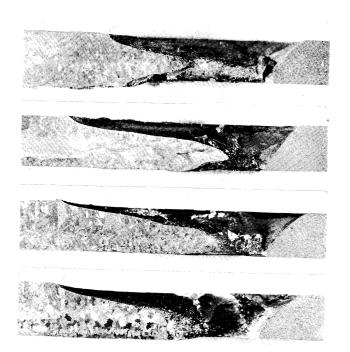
Change in longitudinal cross section of bead welds after molten metal was removed. 160 A, 40 V, 5.5 l/min and 20 cm/min.
